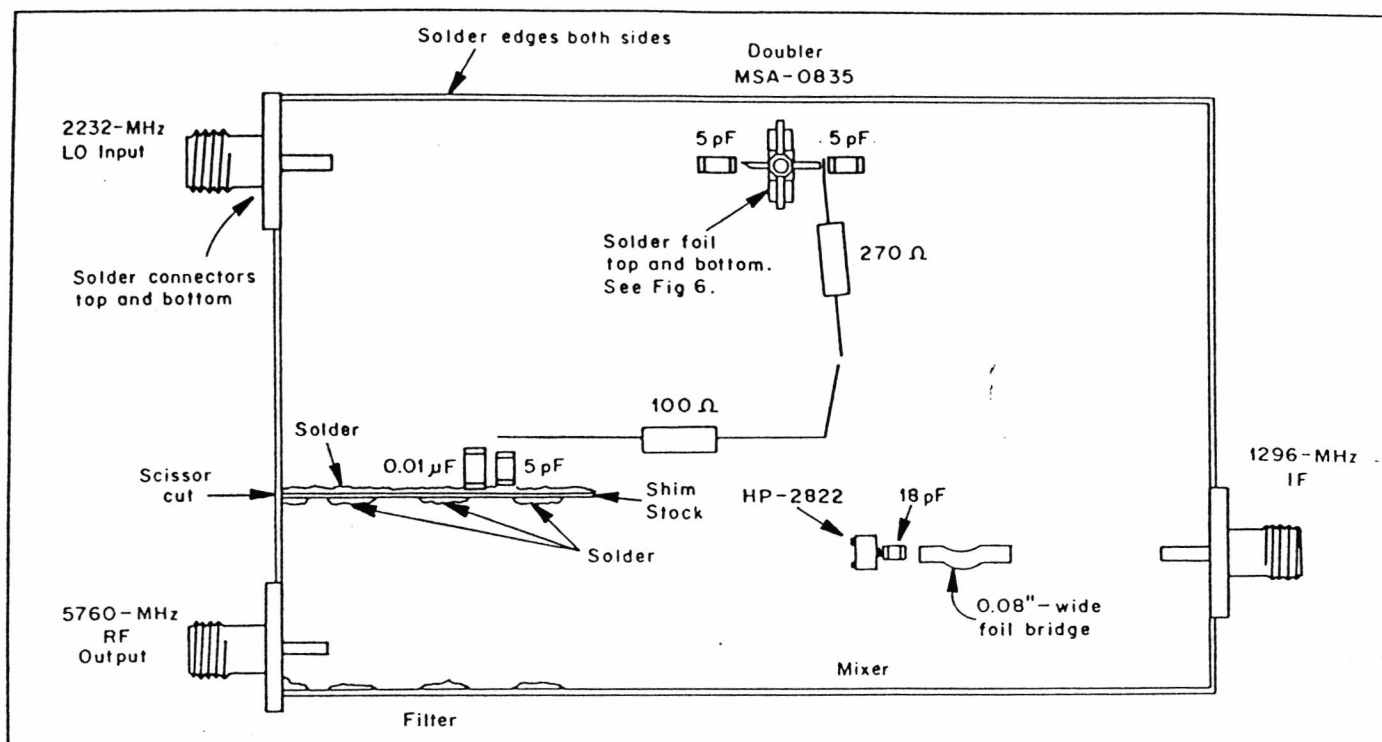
Part-placement diagram for the 5760-MHz transverter board (not shown actual size). All components mount on the etched side of the board. See Fig 6 for mounting details for the MSA-0835 MMIC.
